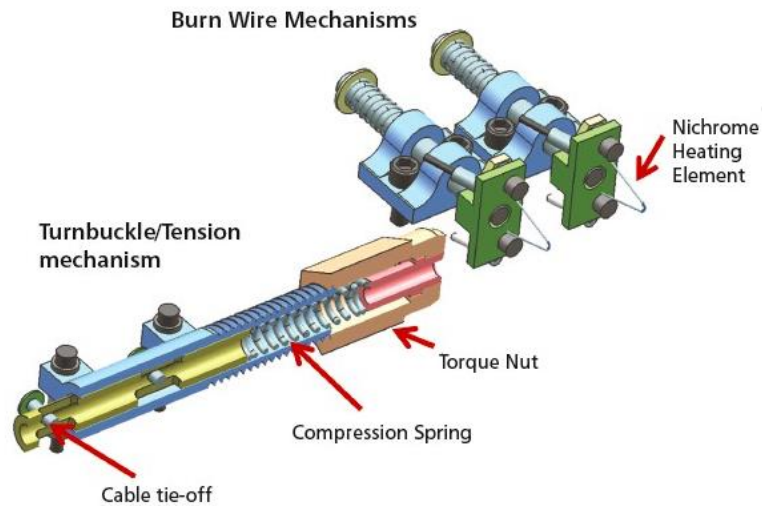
Example design of destructive wire burning showing burning element and tensioning components in cross section ^[7].
